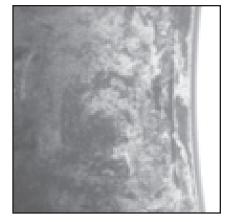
Classic fretting corrosion from poor fitting practice is depicted here. Relative movement under load between the bearing and its seat caused this worn and corroded condition.
